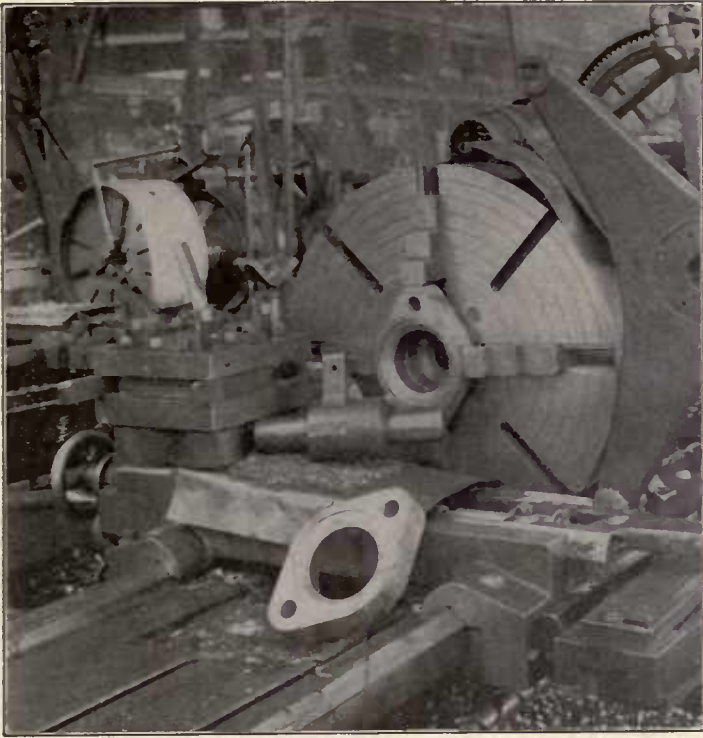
Tool With Five Cutters For Finishing Inside of Piston Rod Gland.
